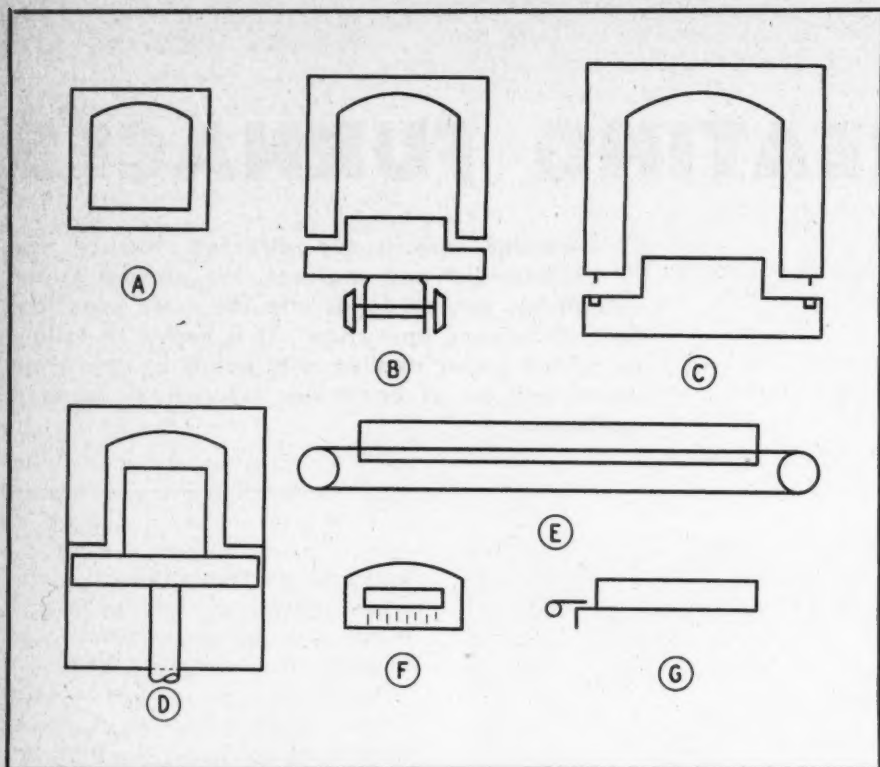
Diagrammatic sketches of heat-treating furnaces. A—Box type; B—curved bottom; C—bell type; D—elevator type; E—conveyor; F—walking beam; G—pusher type furnace.
